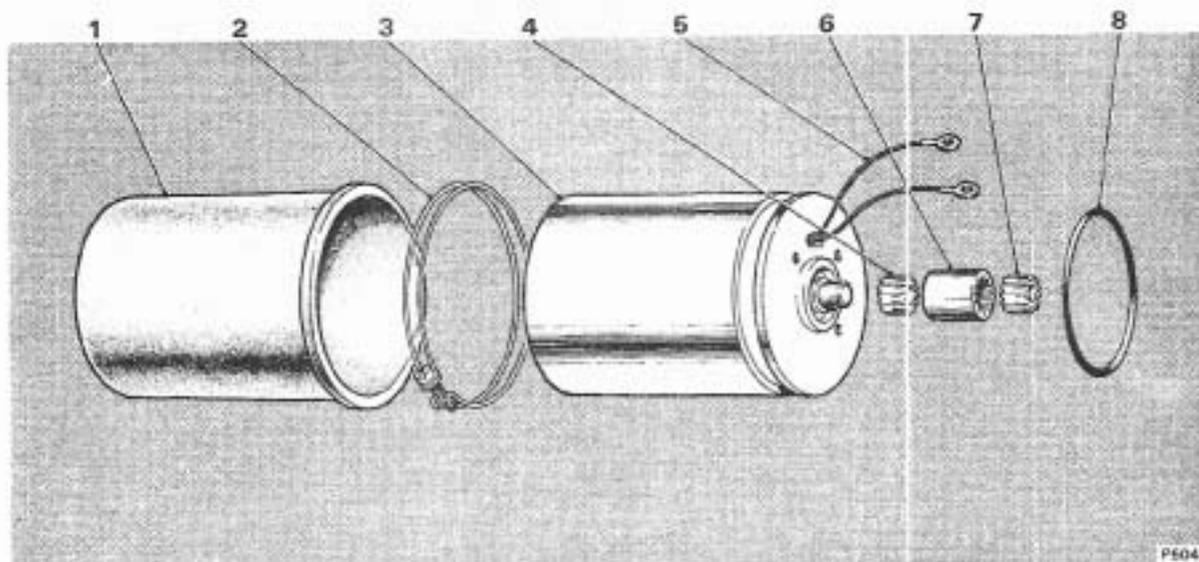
GEARCHANGE ACTUATOR MOTOR
